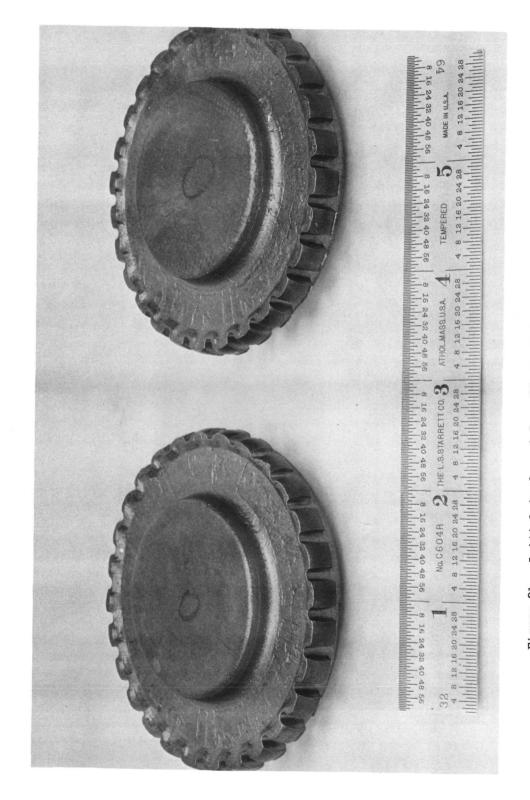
Initial Ausformed Gear Blanks Made on HE-10 CEFF Machine, Note the Minimal Amount of Metal Movement Into the Tooth Configuration
